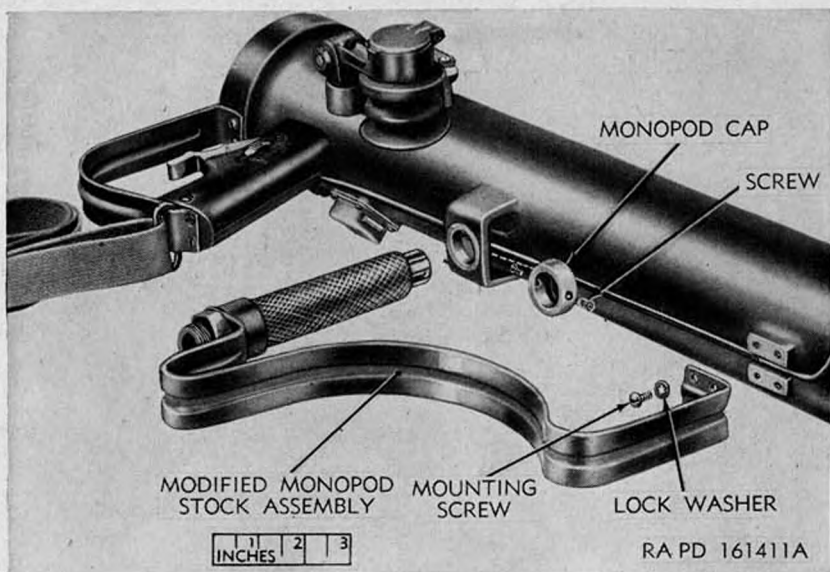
Modified monopod and stock assembly removed from barrel of launcher M20B1 (early mfr).
